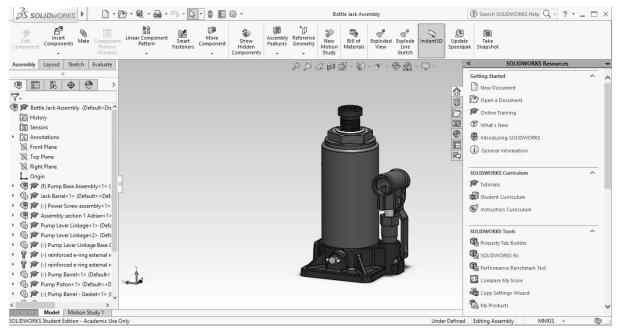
SolidWorks assembly opened from Ecosystem by right-clicking on the image in Fig. 11.
